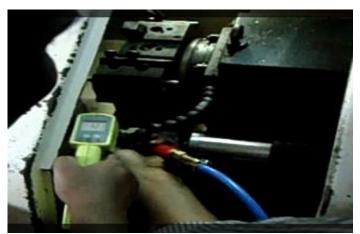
Hard turning of D2 steel using Helium gas impinging as coolant
